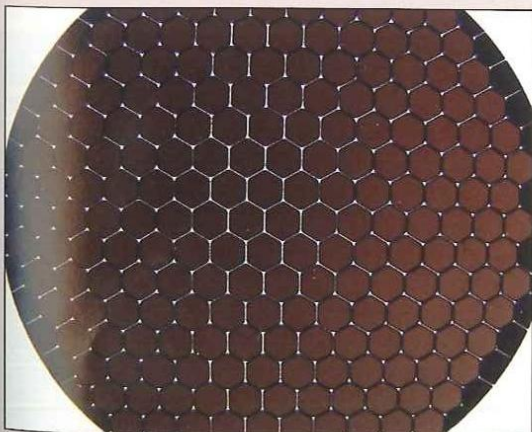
View of wafer after hexagonal chip dicing with the LMJ
